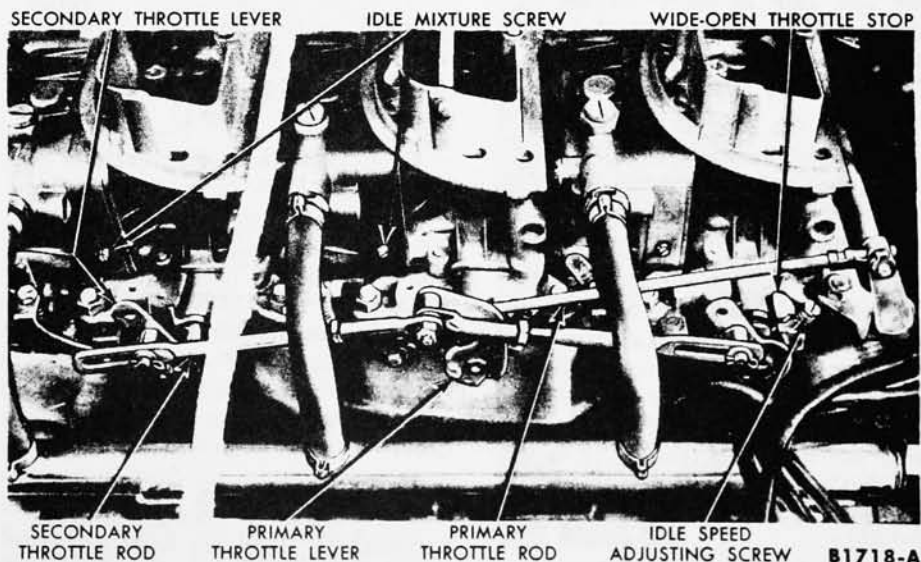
390 6-V Carburetor Throttle Linkage Installation
